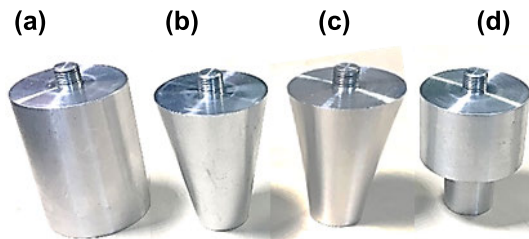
Manufactured (a) cylindrical, (b) conical, (c) exponential and (d) stepped ultrasonic horn.
